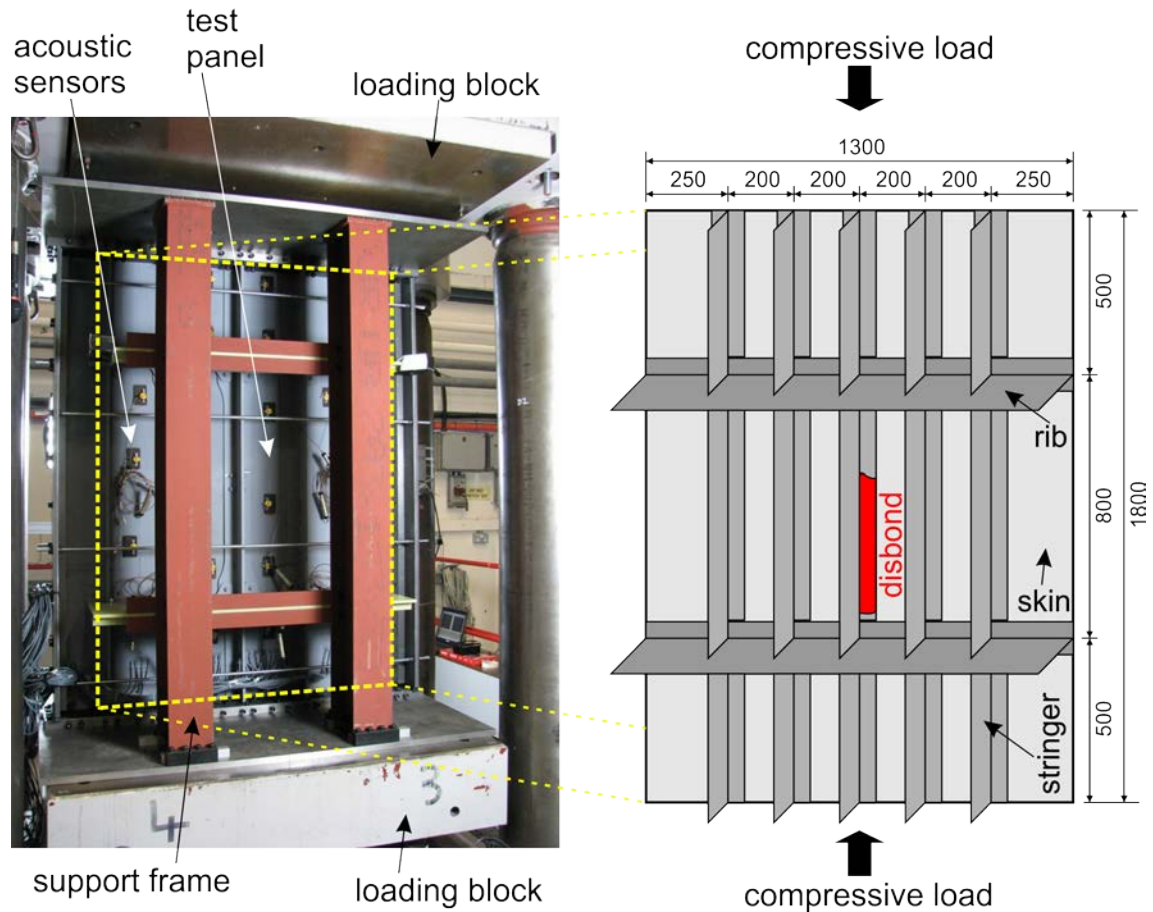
Buckling test specimen of an A350XWB's lower wing cover. Dimensions are expressed in mm.
